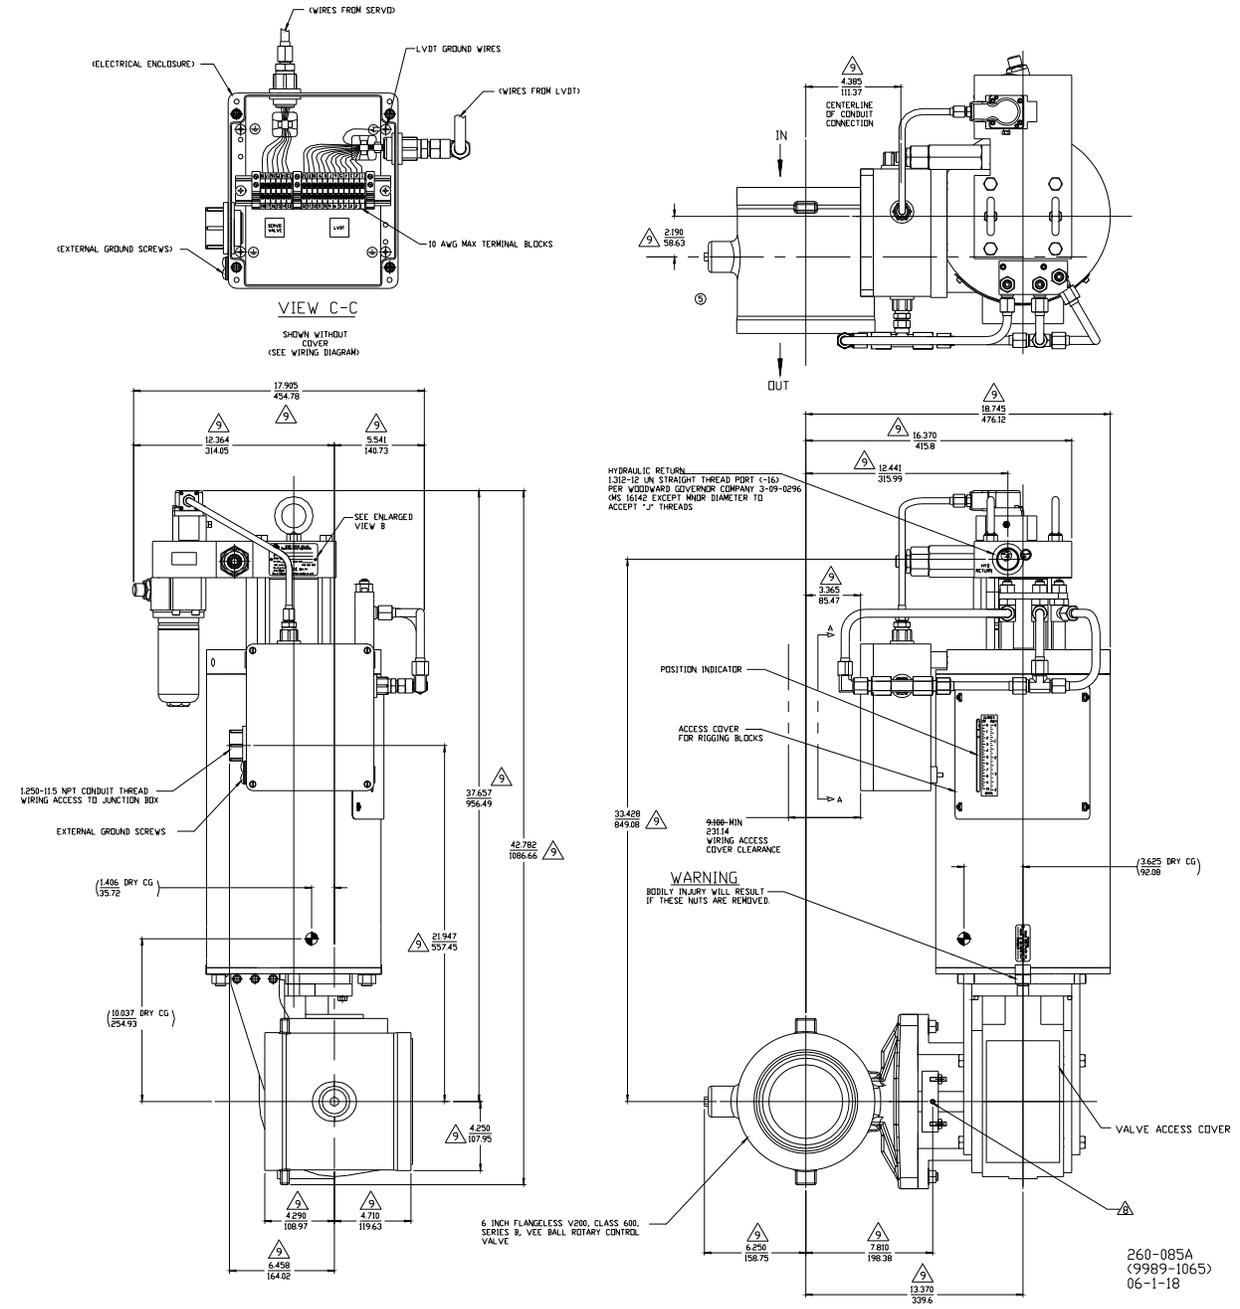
Gas Stop/Ratio Valve Outline Drawing (6-inch, with 3 LVDTs, SS-260)
